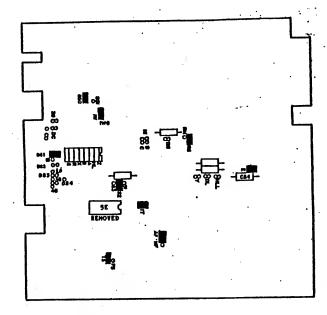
DOUBLE SIDE/MLC 12 PWA Disc Drive Jumper Locations
